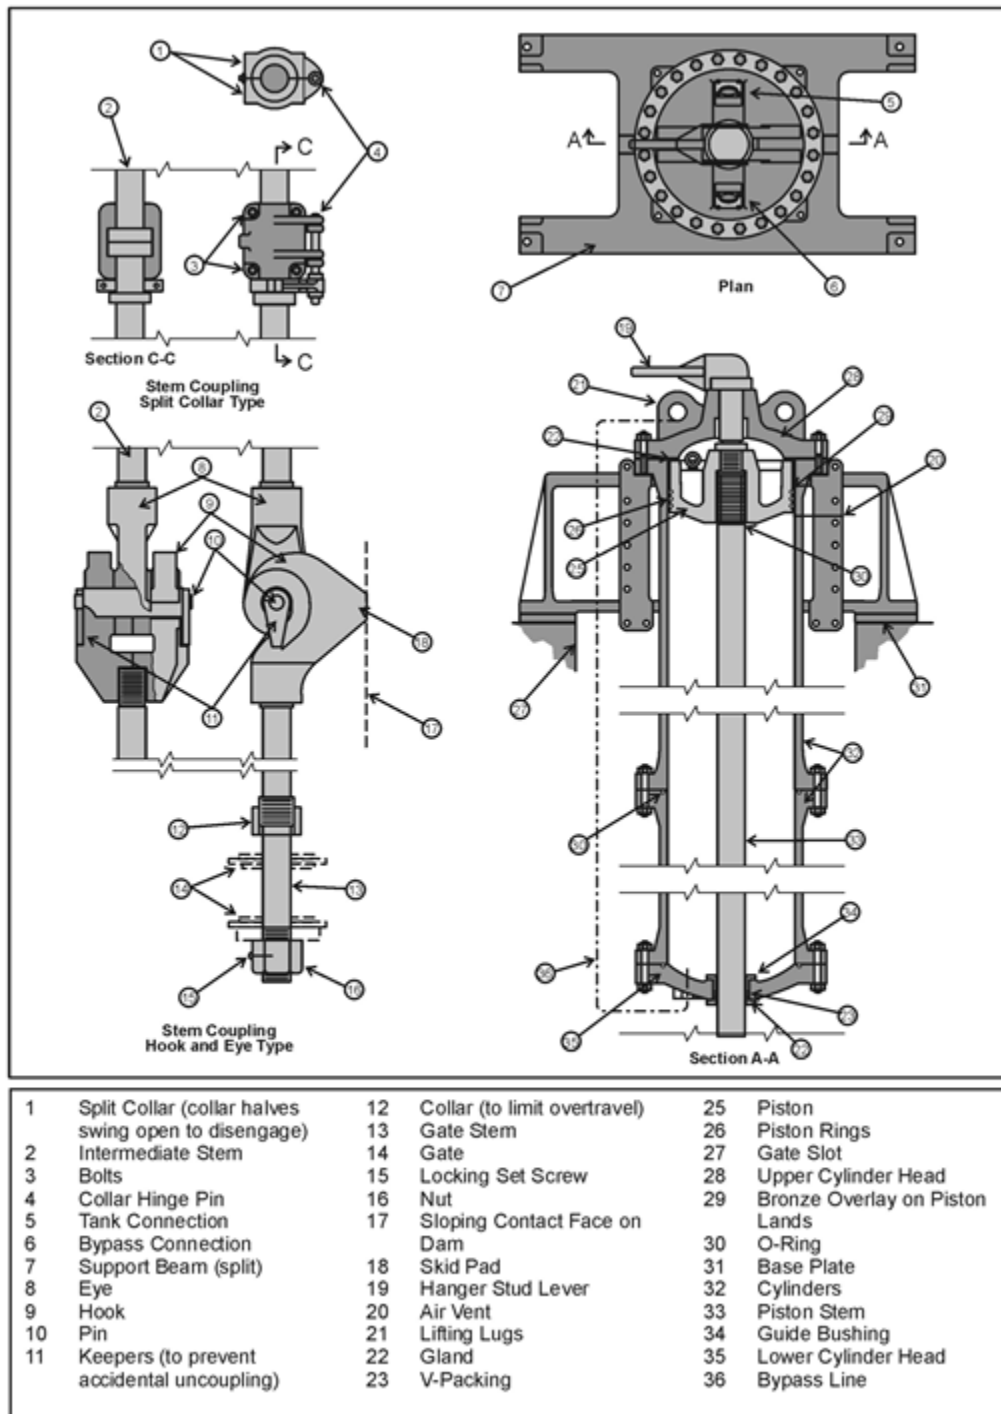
Typical hydraulic hoist system (hydraulic cylinders)
